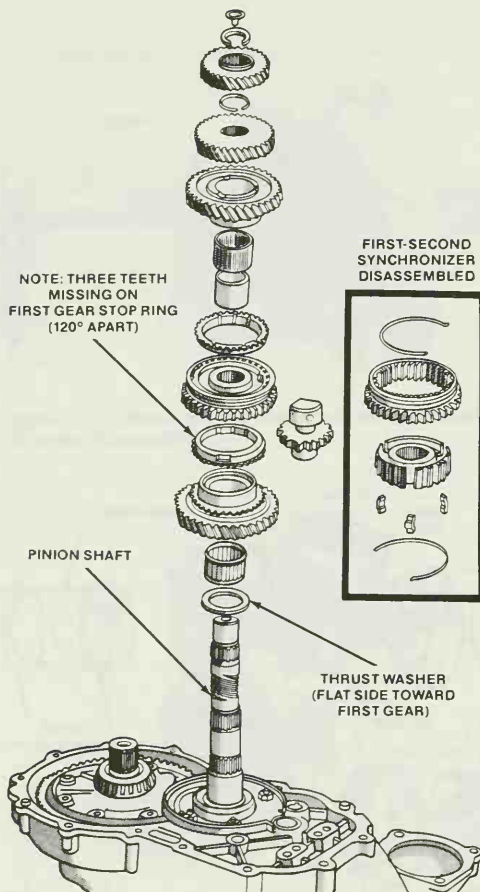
A disassembled view of the pinion shaft assembly. (Chrysler Corporation)
